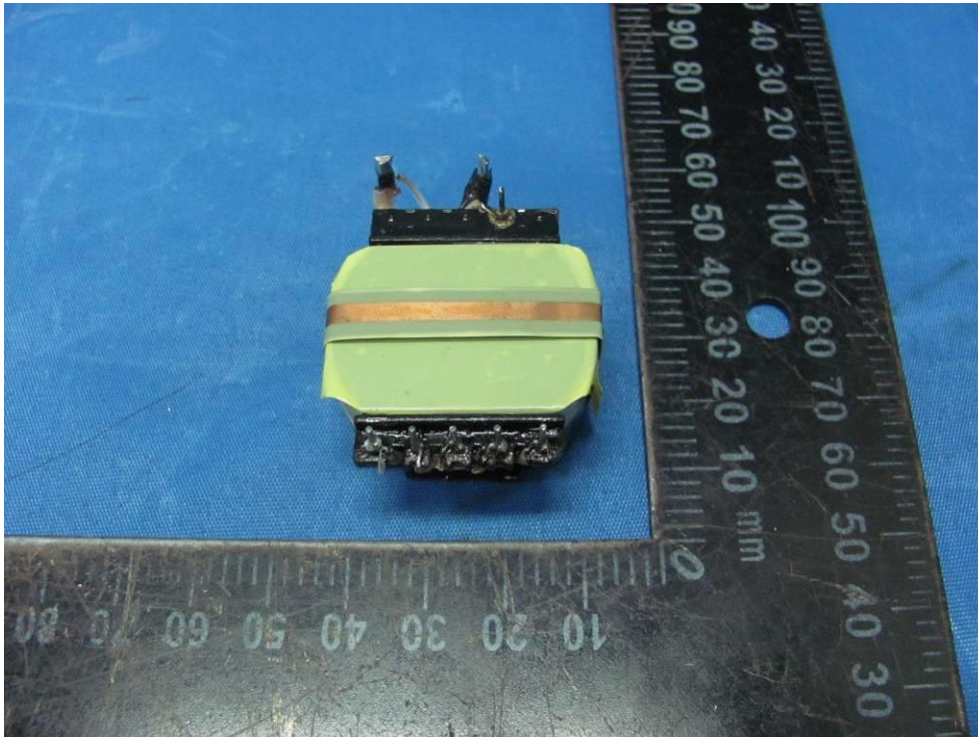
GT\*41133 series Bottom view of mains transformer (The ferrite core is wrapped around 2 layers of insulating tape.)
